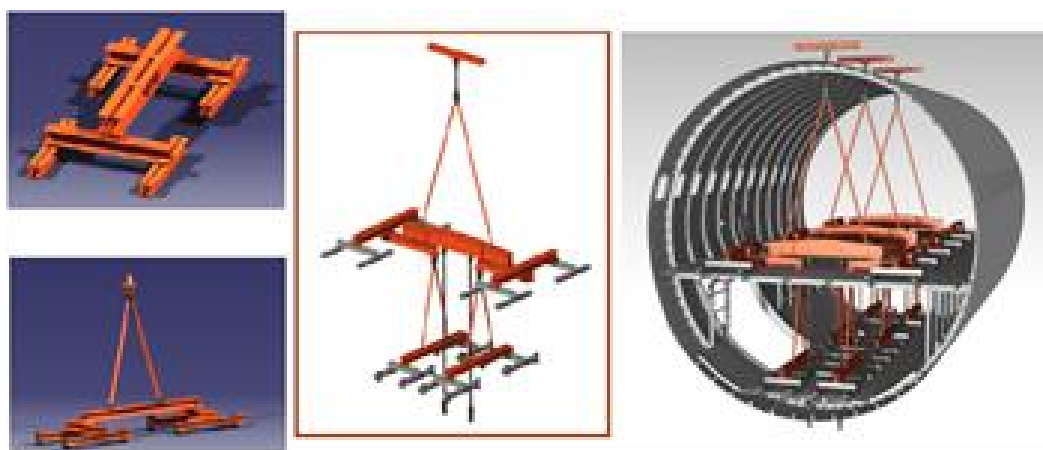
Schematic diagram of loading technology of double floor beams in engine room Large aspect ratio flexible wing load processing and application technology
